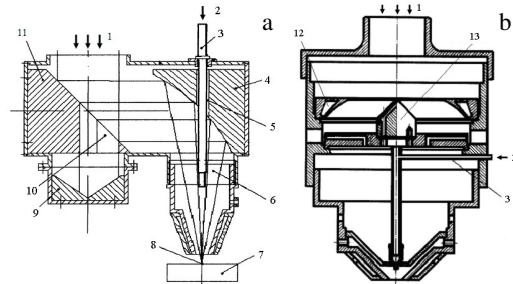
Schematic diagrams of powder feeding head inside a hollow beam
